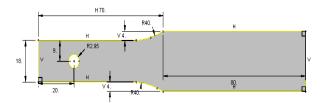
The final dimension of geometric model of perforated Aluminum sheet in mm
